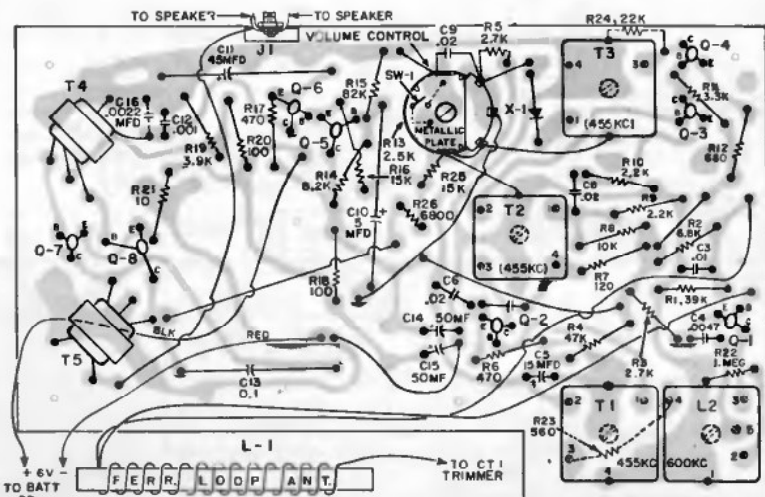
ETCHED PRINTED CIRCUIT CHASSIS 120472 (TOP VIEW)
